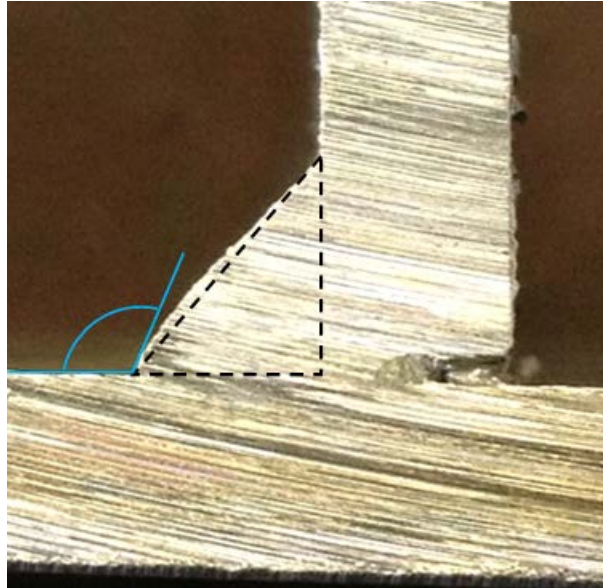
A Cross Section of Weld Bead in “Small-Root opening” Experiment
